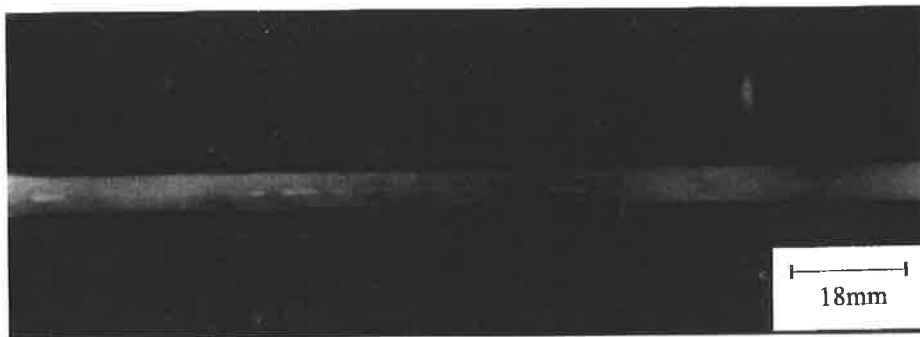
Radiograph of a root pass weld made using the automated equipment showing examples of short hollow bead defects.
